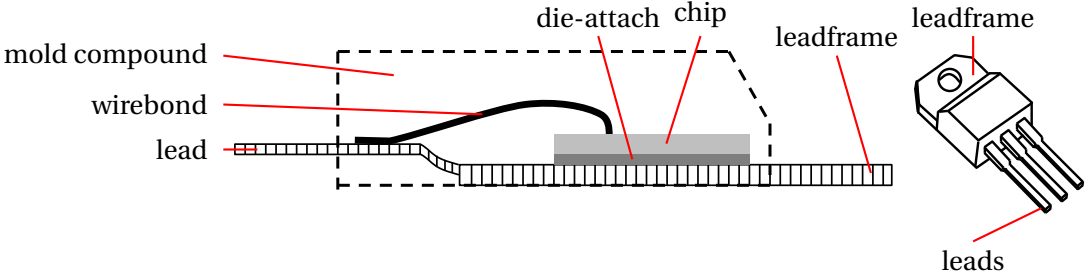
Transistor-Outline (TO) package with a cross-section view and the full view.
